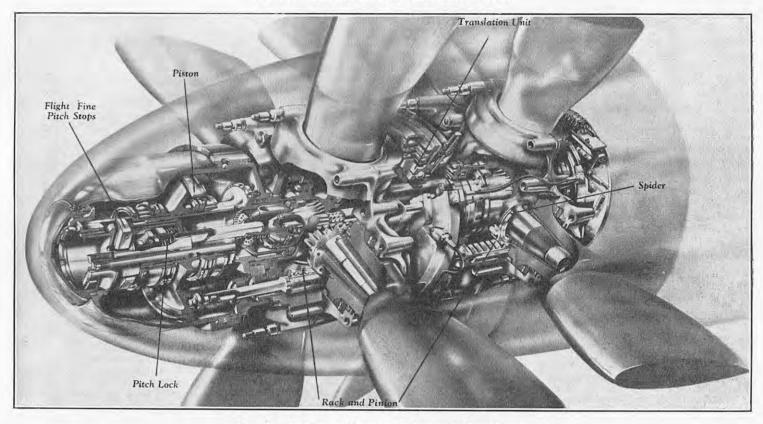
SECTIONED VIEW OF PROPELLER MECHANISMS.
